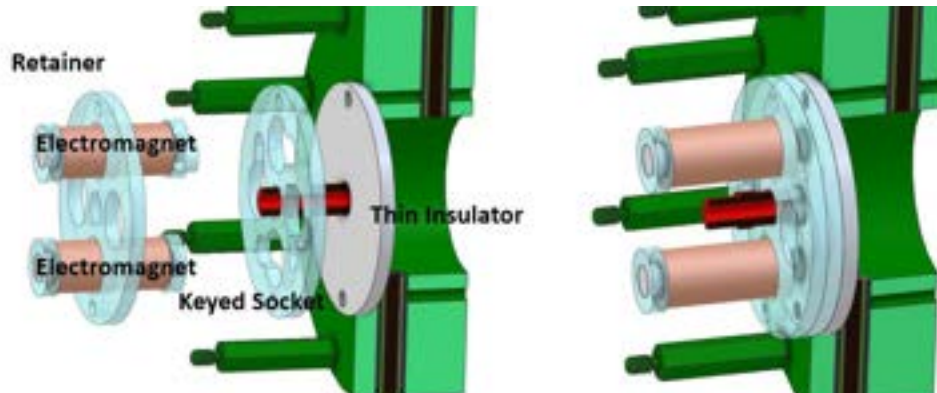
Exploded view (left) and assembled view (right) of EM thrust vectoring configuration with 2 coils.
